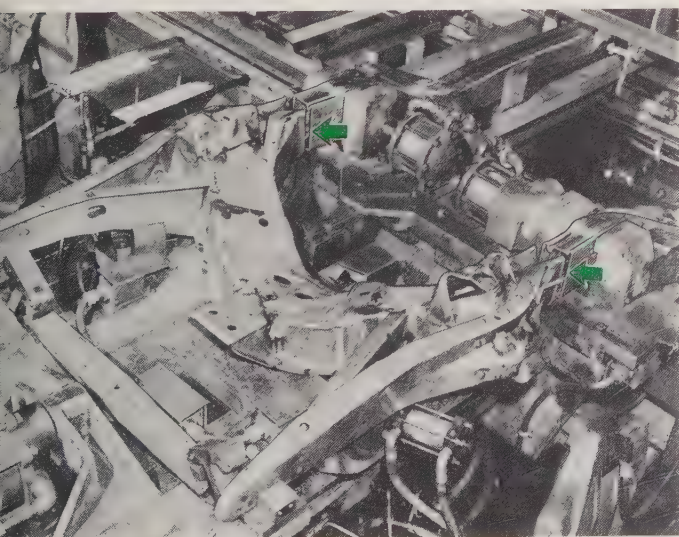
The front cross member of the frame is manually arc welded to the side rails. A positioning conveyor, having fixtures which hold a left-hand and right-hand rail at the correct distance apart, automatically stops directly opposite the front cross member locating fixtures (left). The locating fixture
